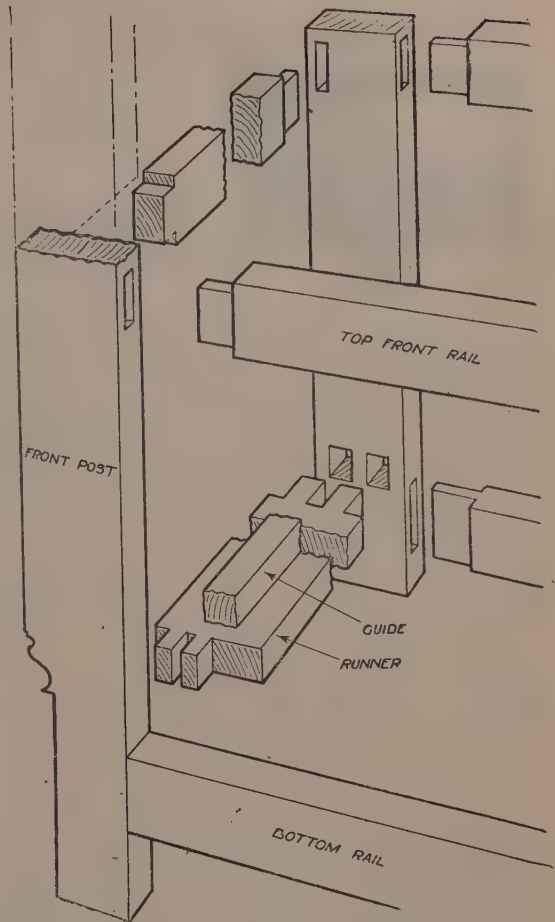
DETAIL OF WARDROBE CONSTRUCTION.
